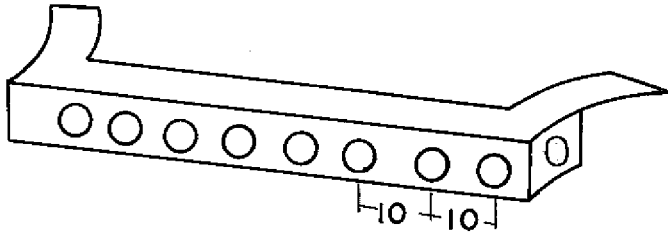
Experimental technique for measurement at the inside of pressure and calandria tube
